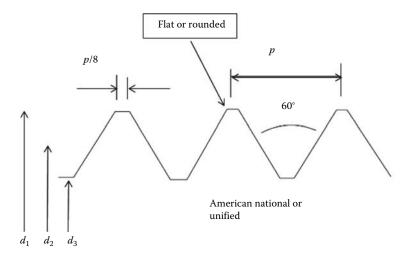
Thread illustrating American National or Unified and SI^[25]
